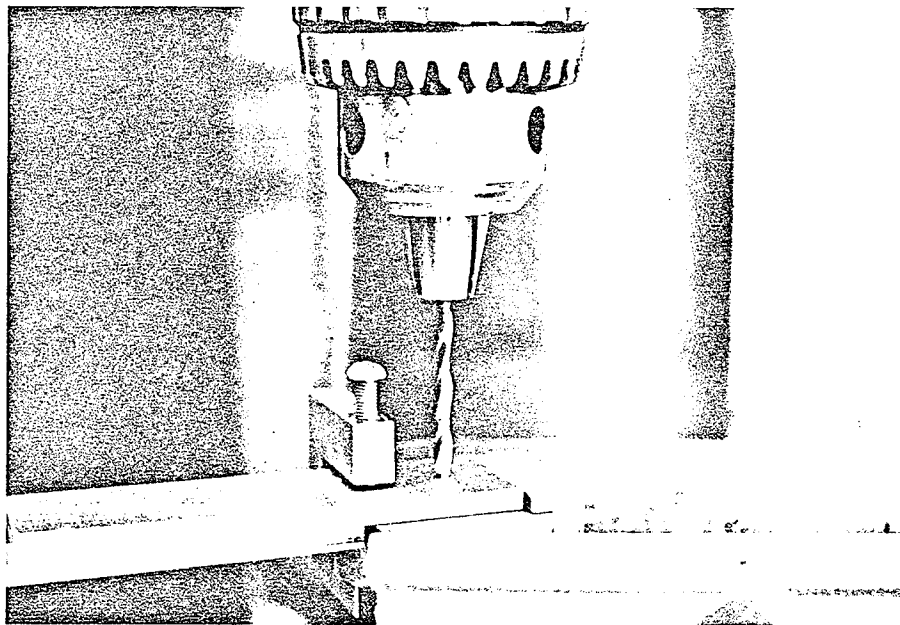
Die and Jig for Drilling of Fatigue Specimens
